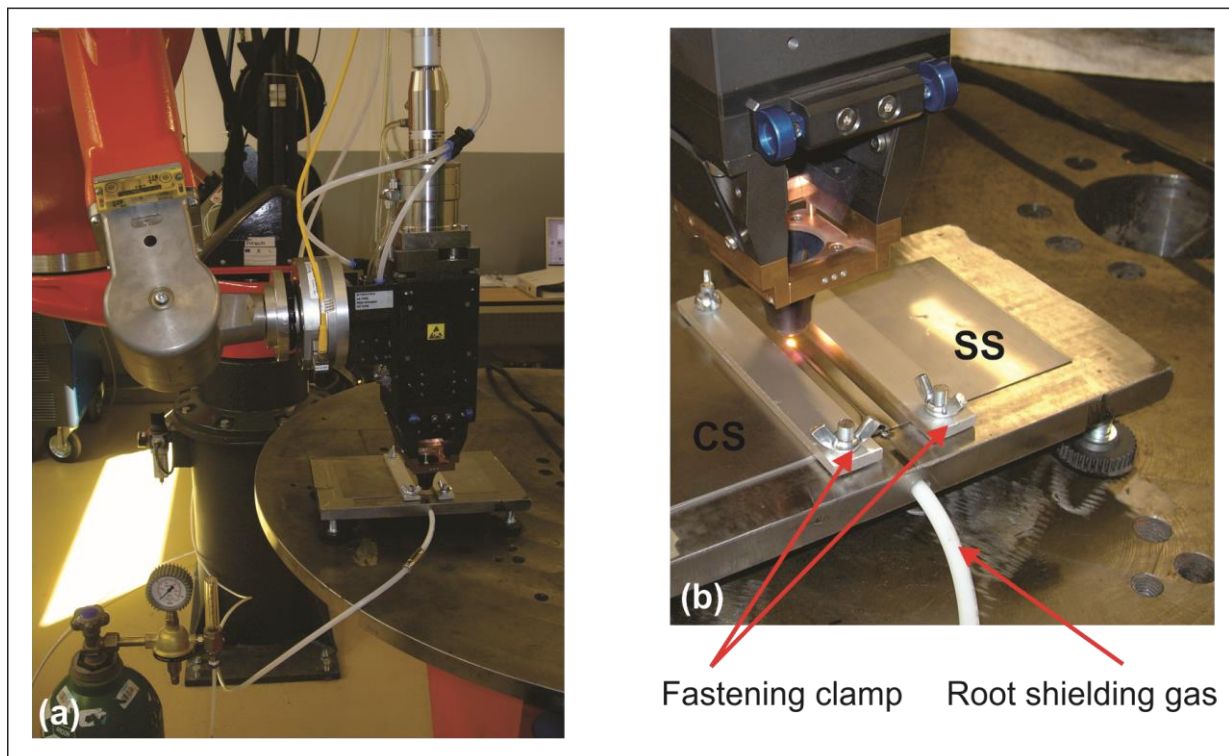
(a) Experimental set-up used for the laser welding tests, (b) close-up of positioning and fastening device. "Advanced Welding Ecotechnology R&D Center" from Transilvania University of Brasov [STA18].
